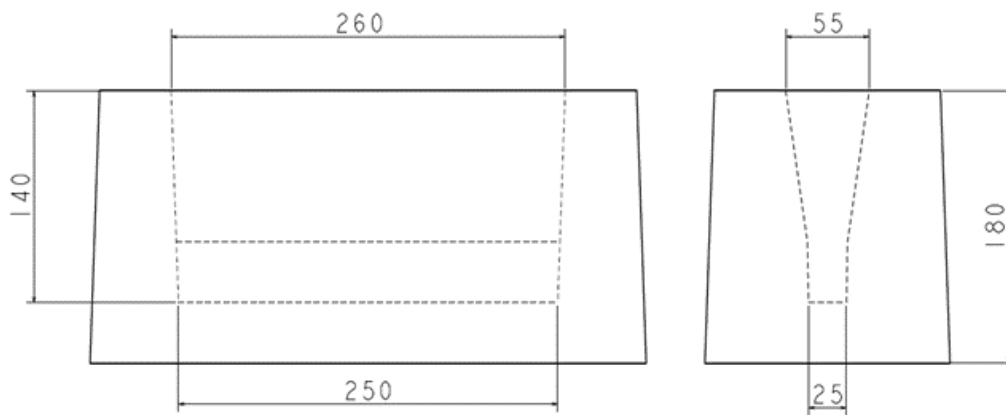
Permanent mold specimen (a) and sand mold specimen (b)
